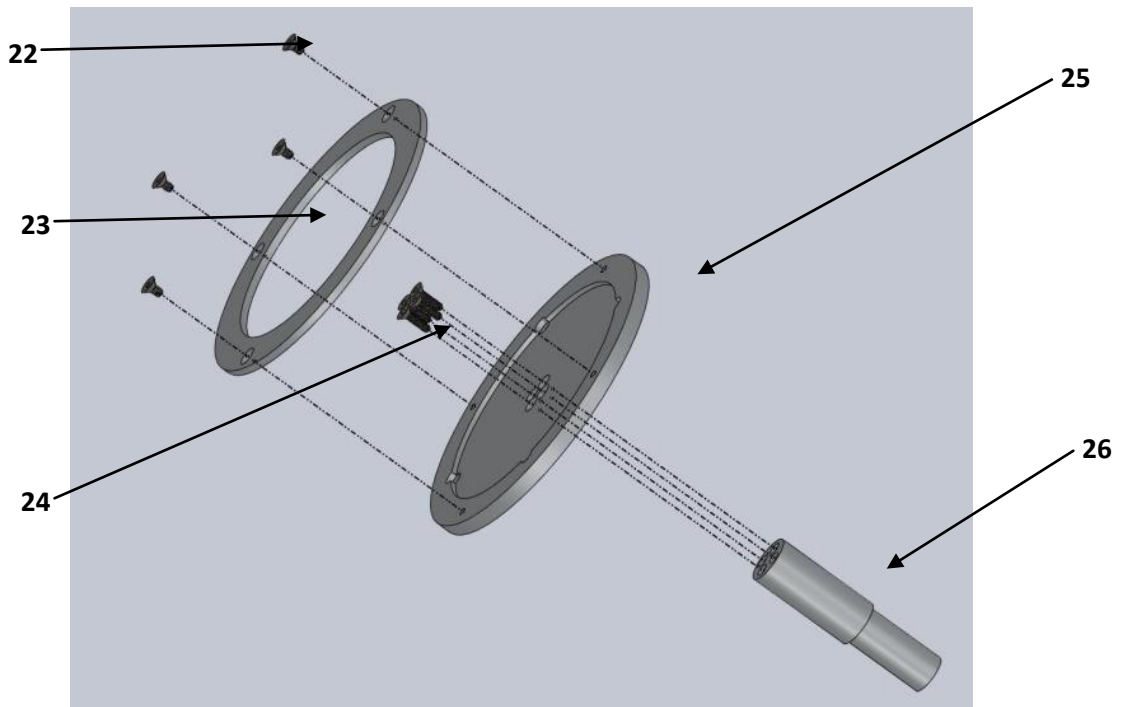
Fixture Assembly (G) – (22, 23, 24, 25, 26)
